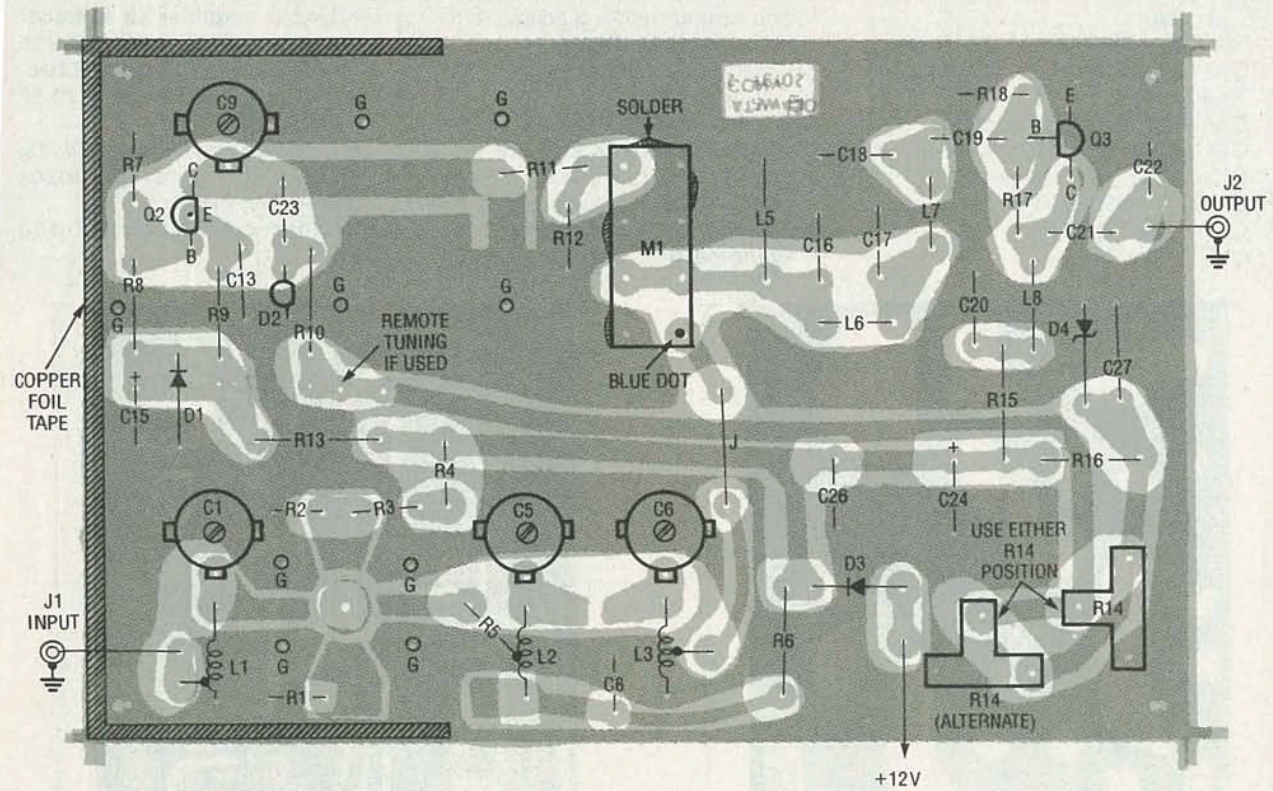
PARTS-PLACEMENT DIAGRAM. This layout must be followed exactly to duplicate the performance of the downconverter. Some components mount on the solder side of the board as shown in Fig. 6.
